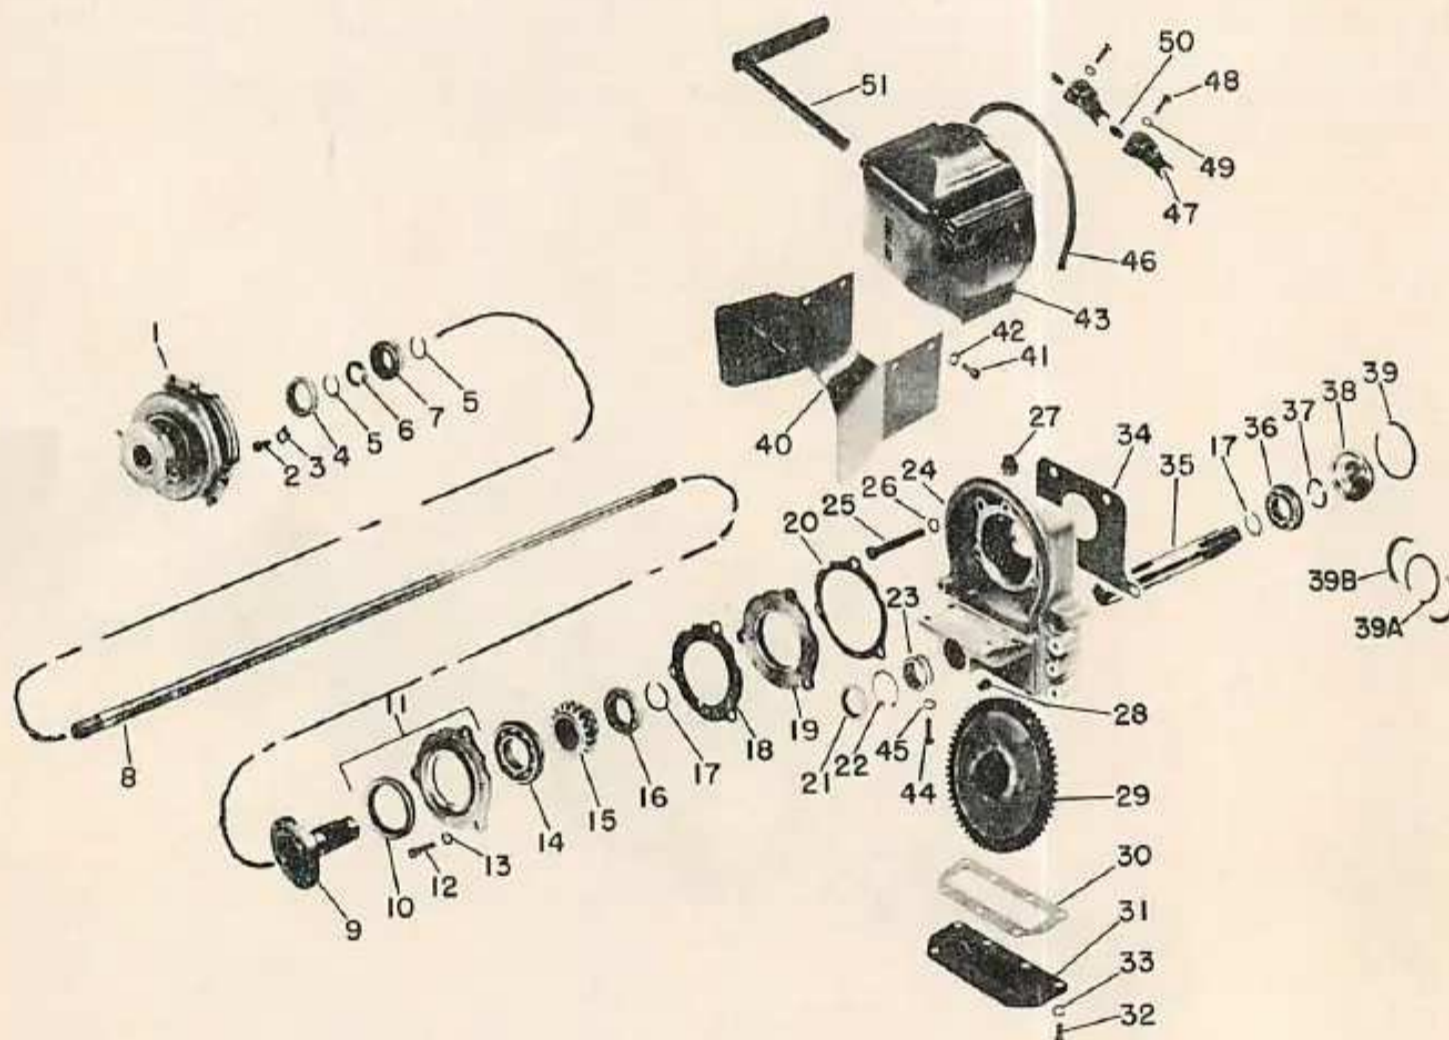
Exploded view of the single speed power take-off unit that is available for Series 1600 models. Refer to Fig. O134 for exploded view of clutch assembly (1), and to Fig. O135 for control lever and linkage.
